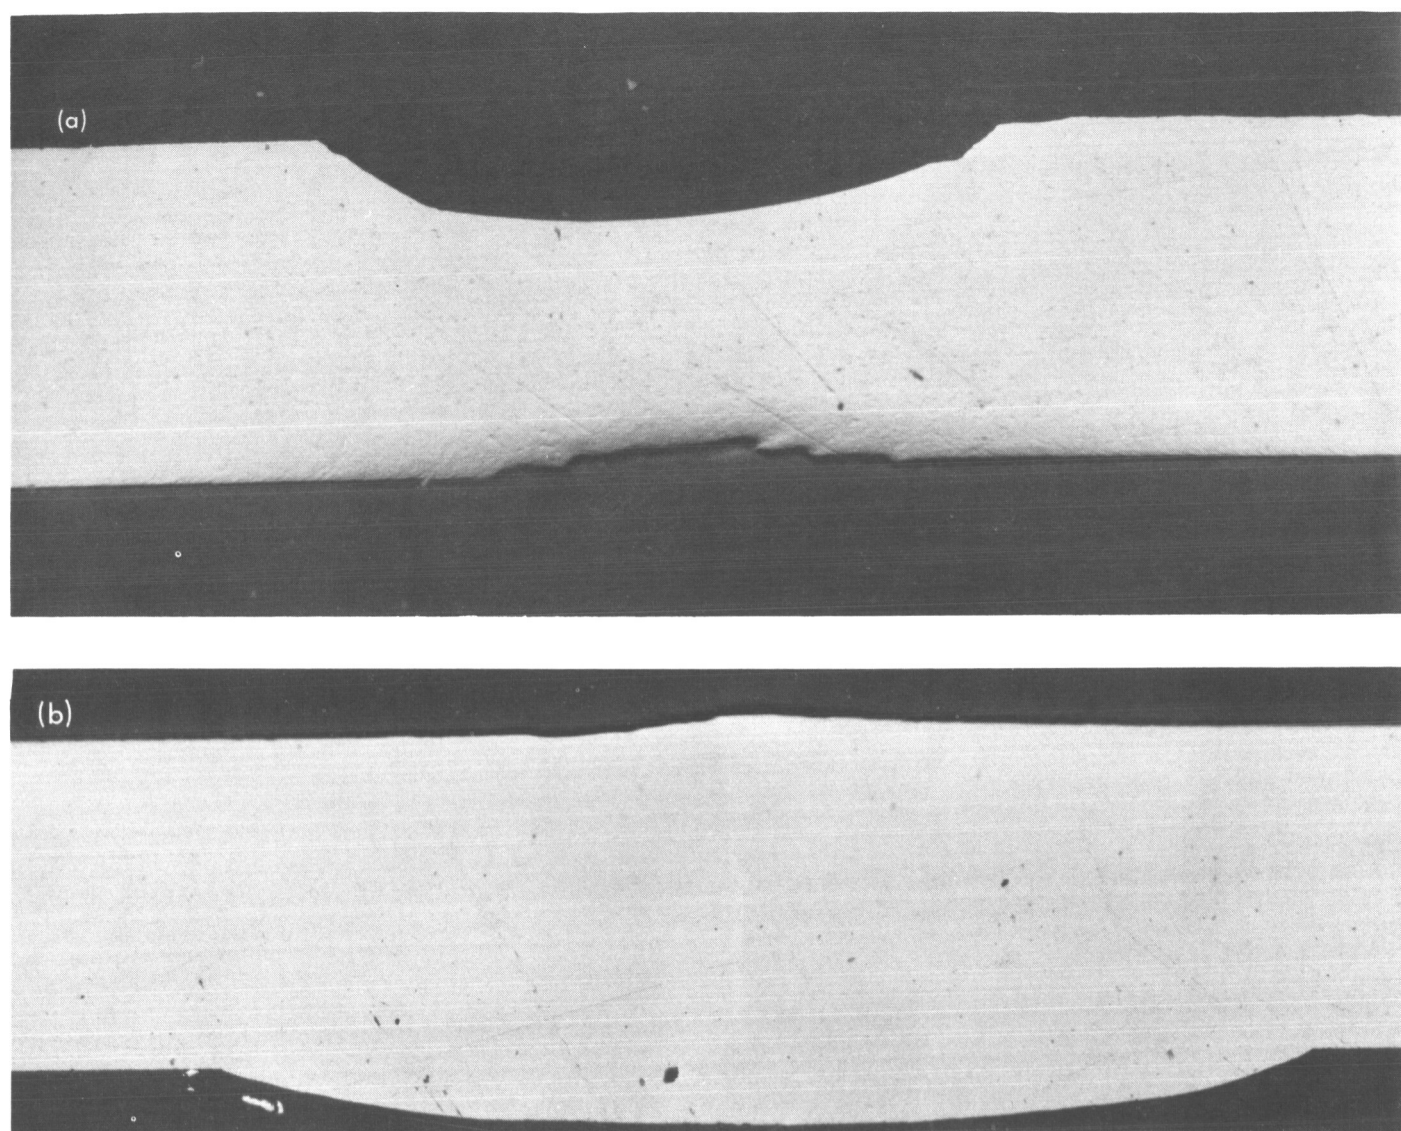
Macrographs of TIG field welds (a) fusion pass (b) filler wire
